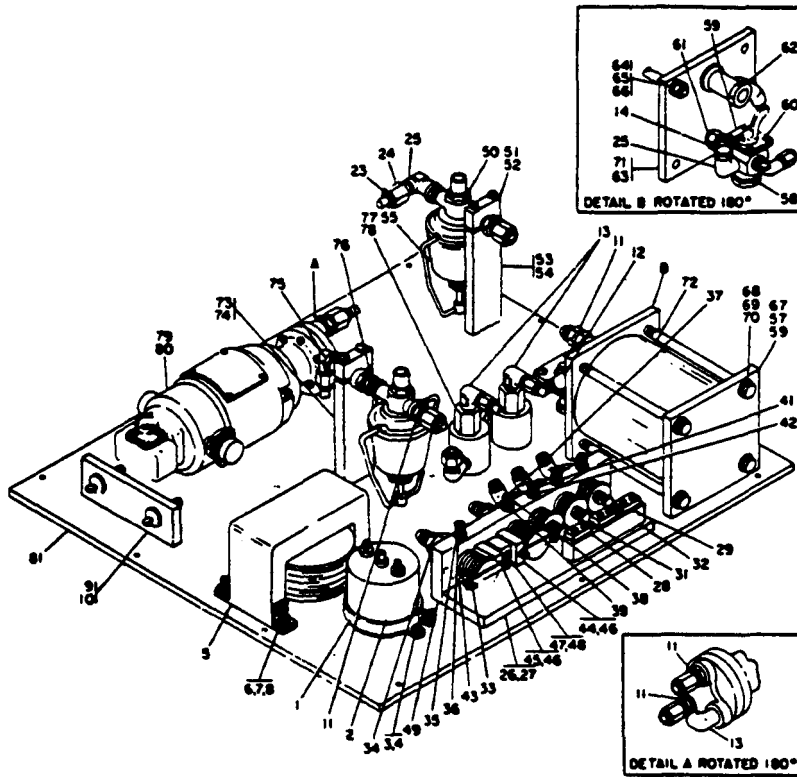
Bottom Plate Assembly (Sheet 1)
